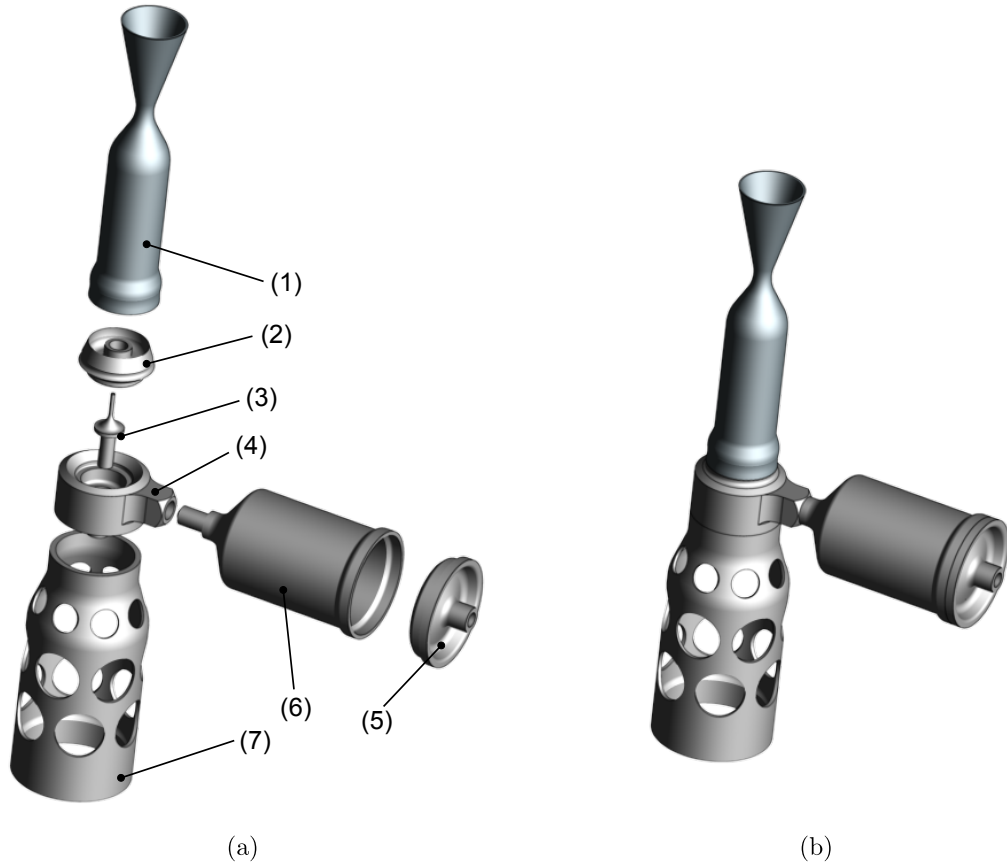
(a) Exploded view of the structural components: (1) Thrust chamber, (2) Insert ring with injector, (3) Fuel-needle, (4) Propellant manifold, (5) Cap, (6) Decomposition chamber, (7) Thermal barrier cylinder. (b) Thruster in assembly configuration.
